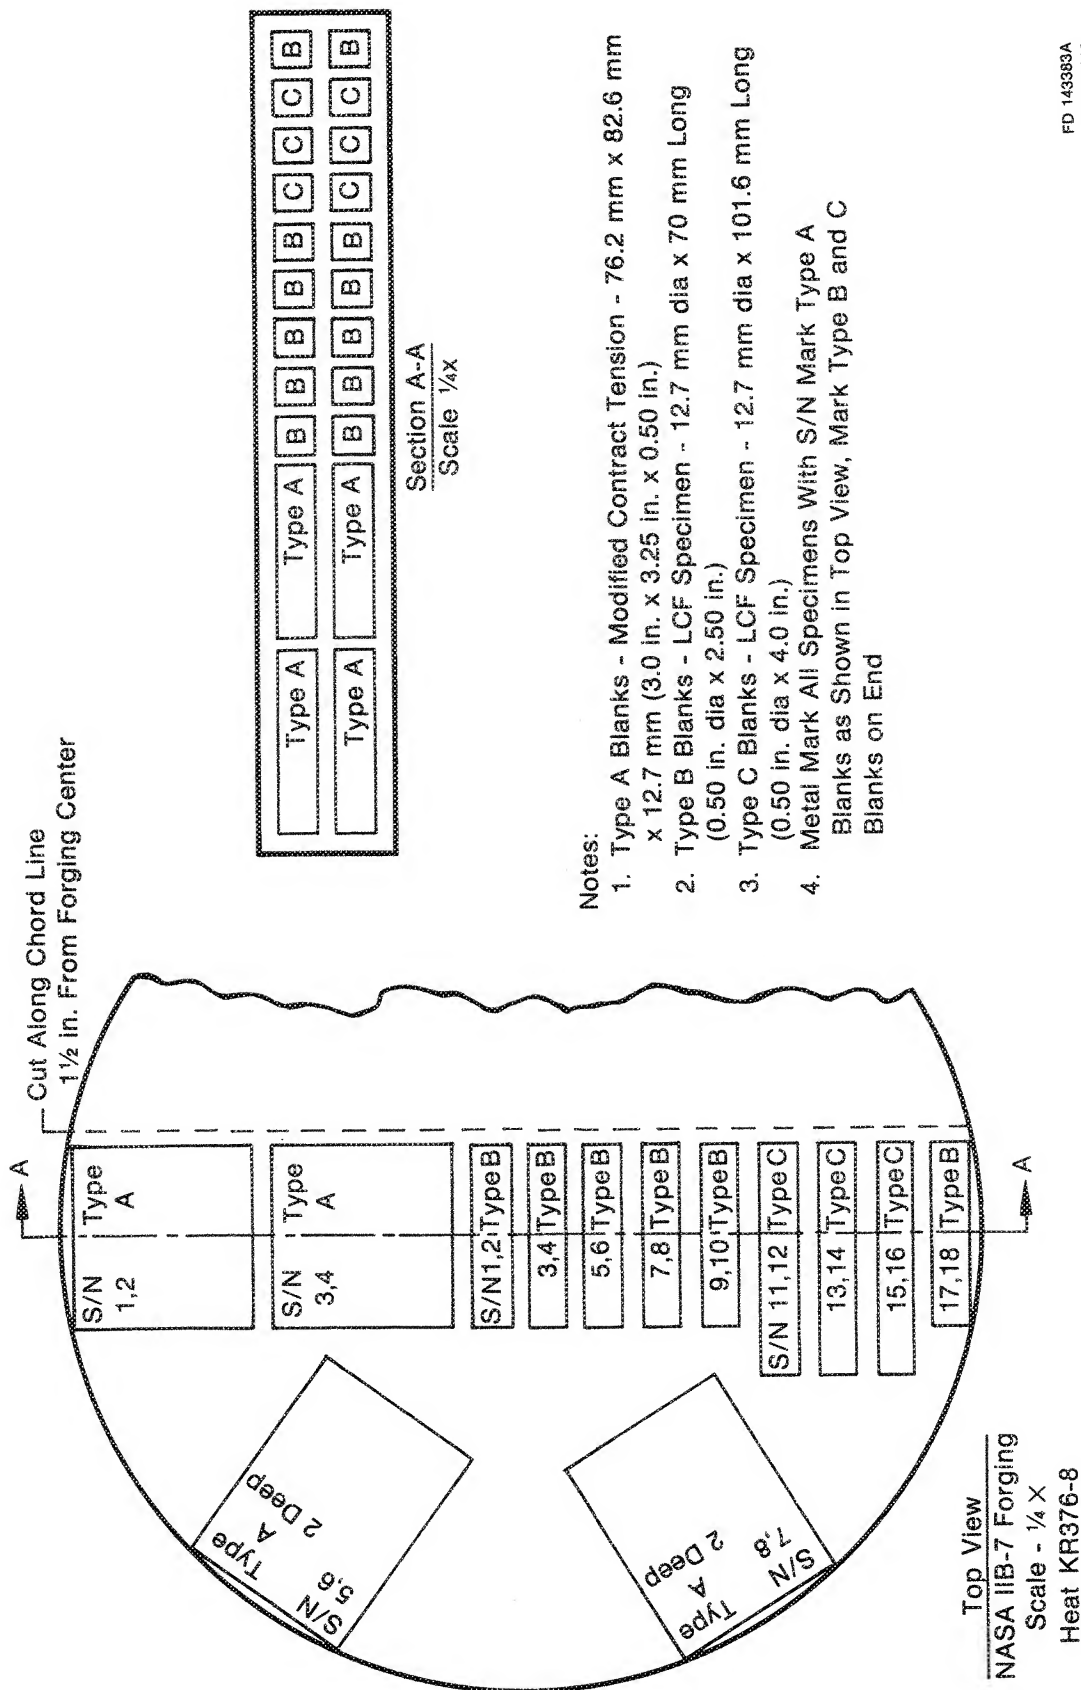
Alloy 1 — Wrought Waspaloy Turbine Disk Forging Schematic Layout Showing Location and Orientation of Specimen Blanks
